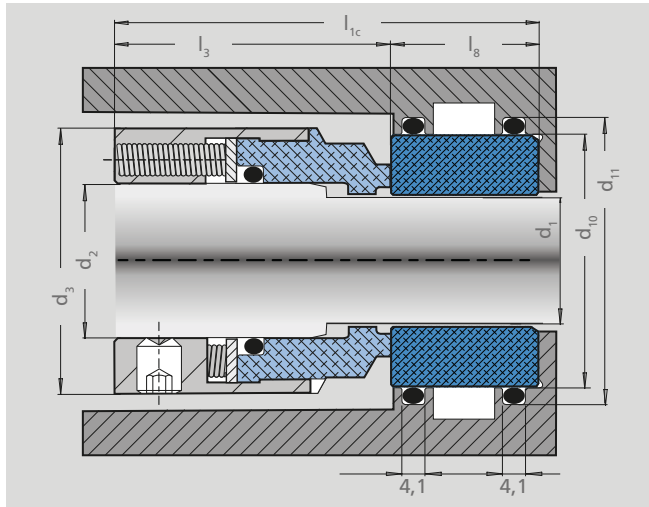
Variant 5HG-BM3C, dimensions see table below
